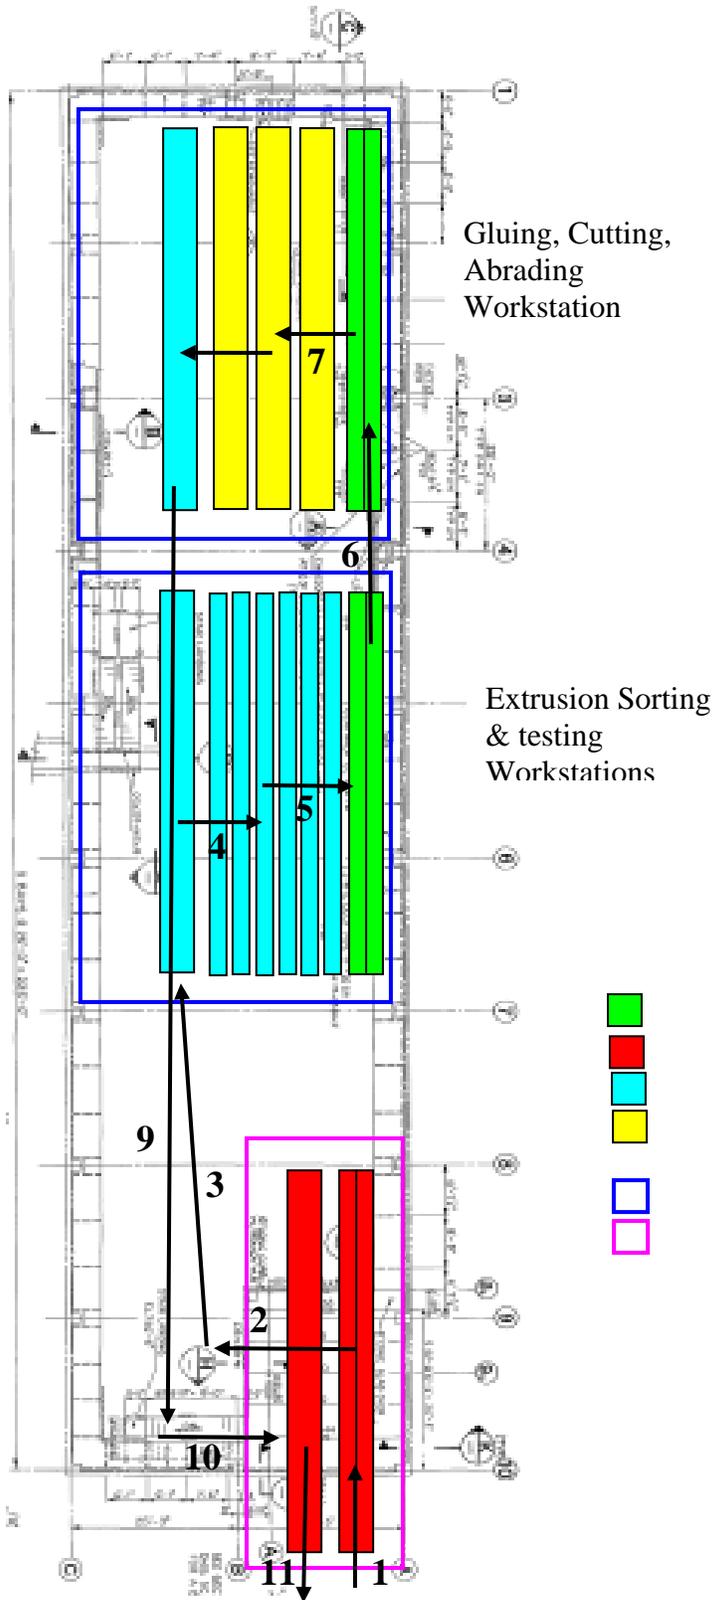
Movement of extrusions through the extrusion assembly factory at the Fermilab Wideband Beam Laboratory. Increasing numbers show the flow of the extrusions.
